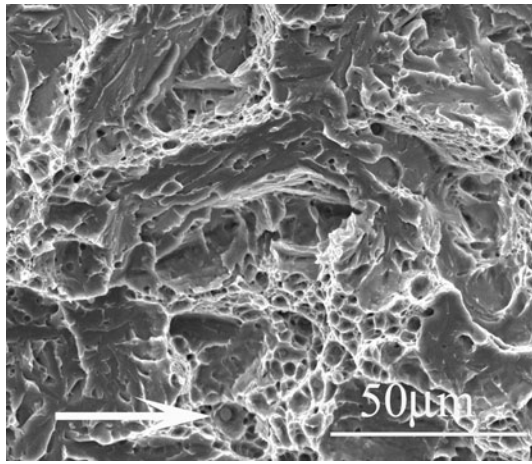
SEM fractograph in as-welded (80A) condition showing cleavage fracture
